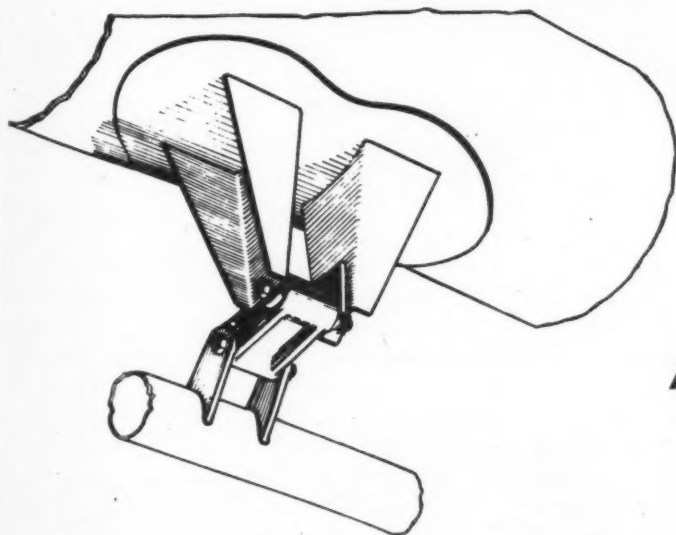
Below—Typical ball and socket collector mounting using link attachment
